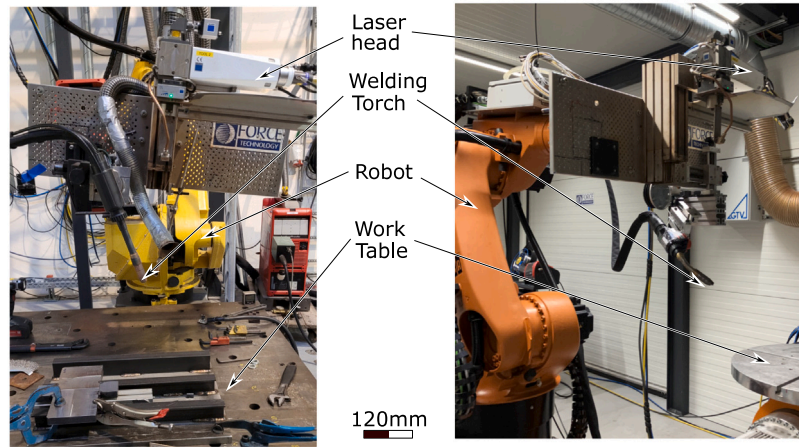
First (left) and second (right) LAHW welding set-ups used in the research.
